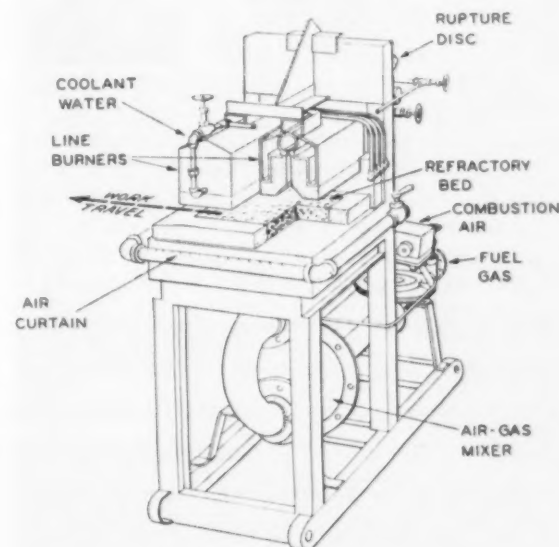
Cutaway view of slot type high speed heater with water cooled line burners and impact refractory bed.
